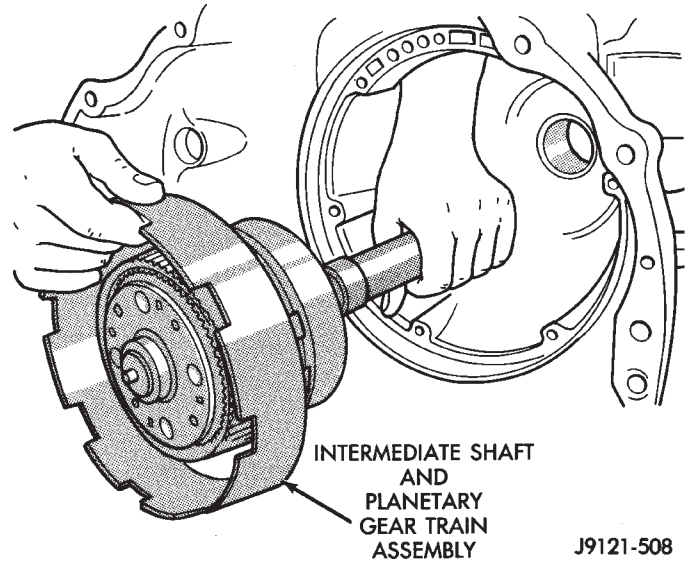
Intermediate Shaft And Planetary Geartrain Assembly Removal/Installation
